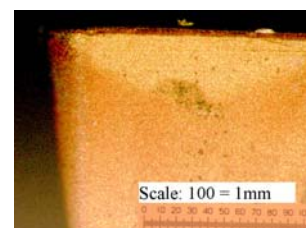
Picture showing flank wear for an air-cooled cut after 1 minute of machining at a cutting speed of 190 m min⁻¹ and feed rate of 0.23 mm/rev with a 2 mm depth of cut [7]
